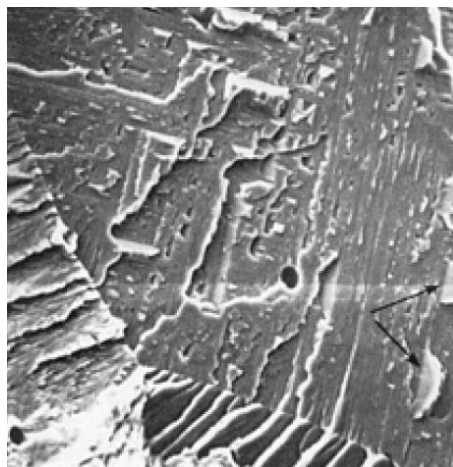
3 – Polycrystalline-tongue-featured cleavage fracture surface [8].
